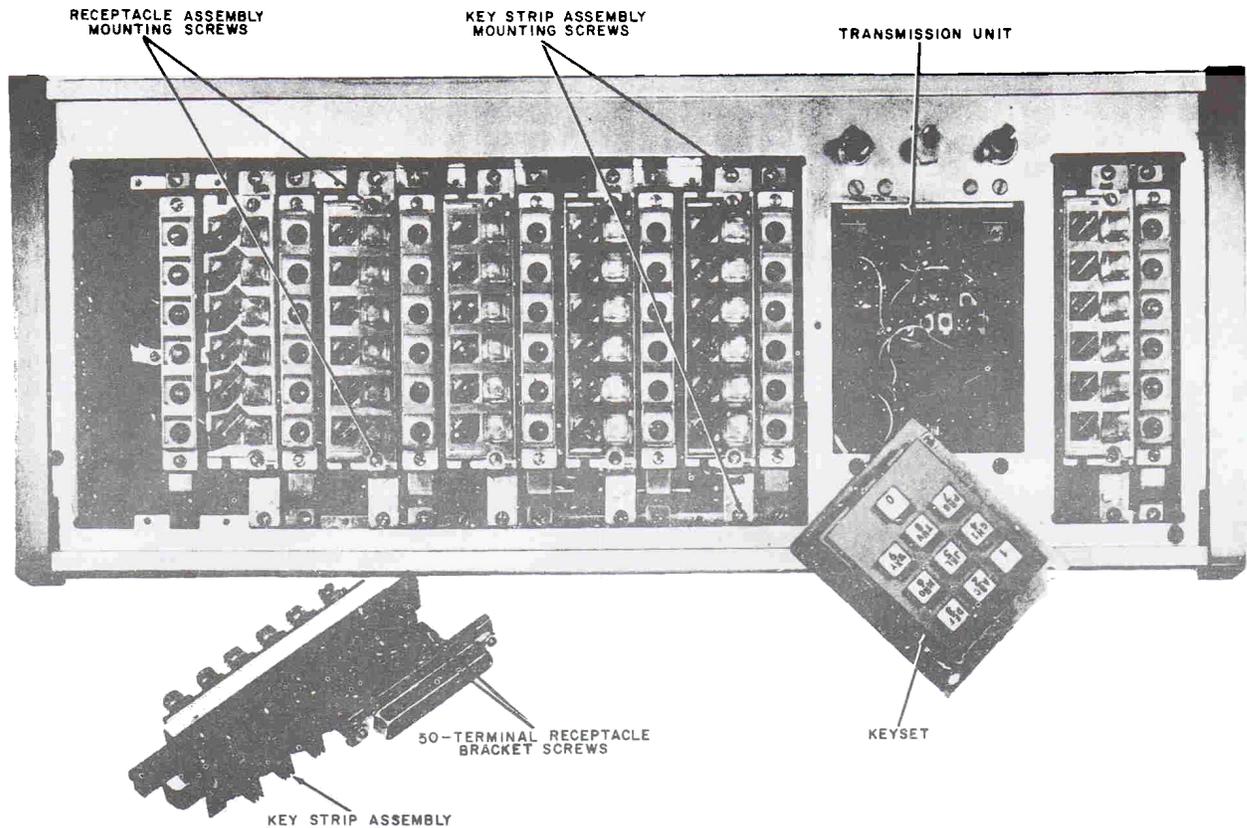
Attendant Turret, Showing Keystrip Assembly and Keypad Removed.
